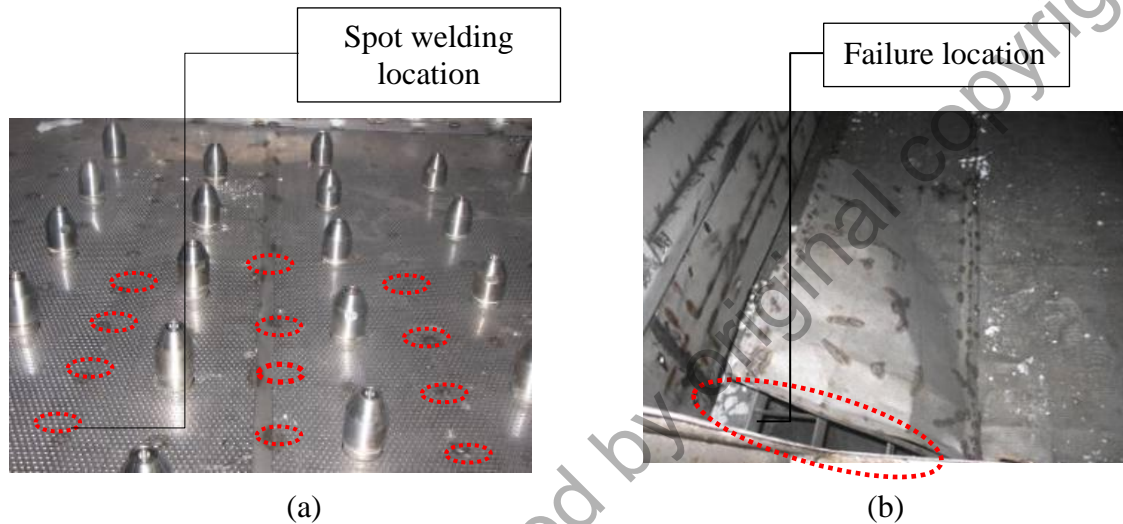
(a) Perforated plate in good condition; (b) Perforated plate lifted off due to joint failure
